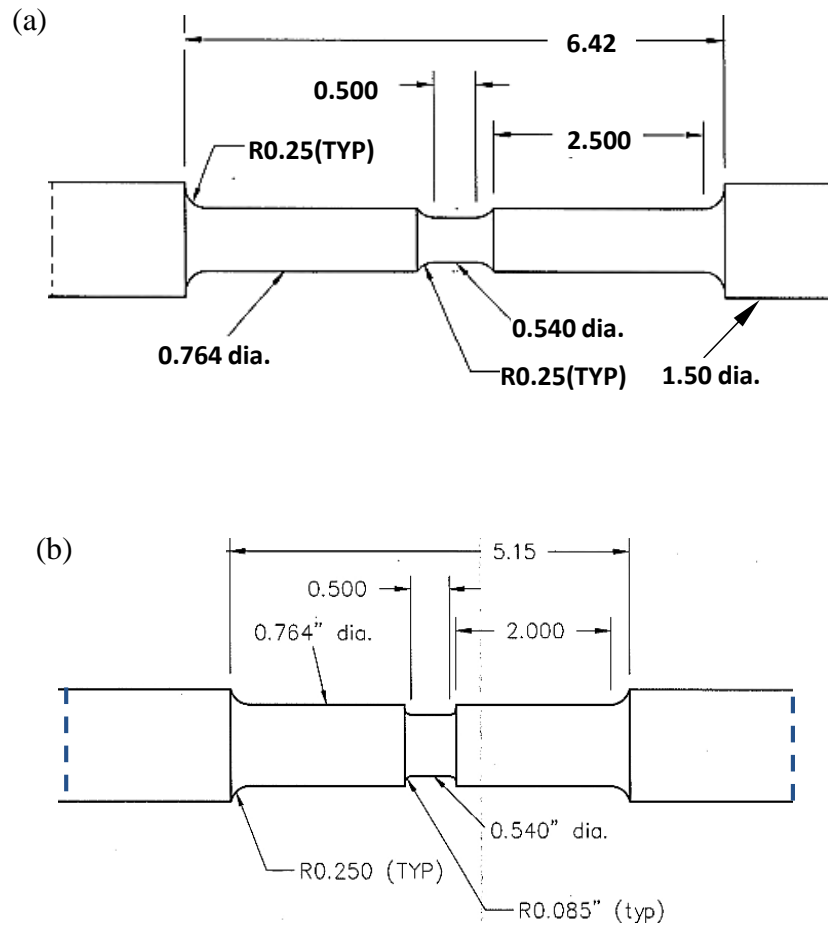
Drawing for two SMT specimen test articles. The detail dimensions of (a) Type I geometry and (b) Type II geometry are listed in Table 4.2
